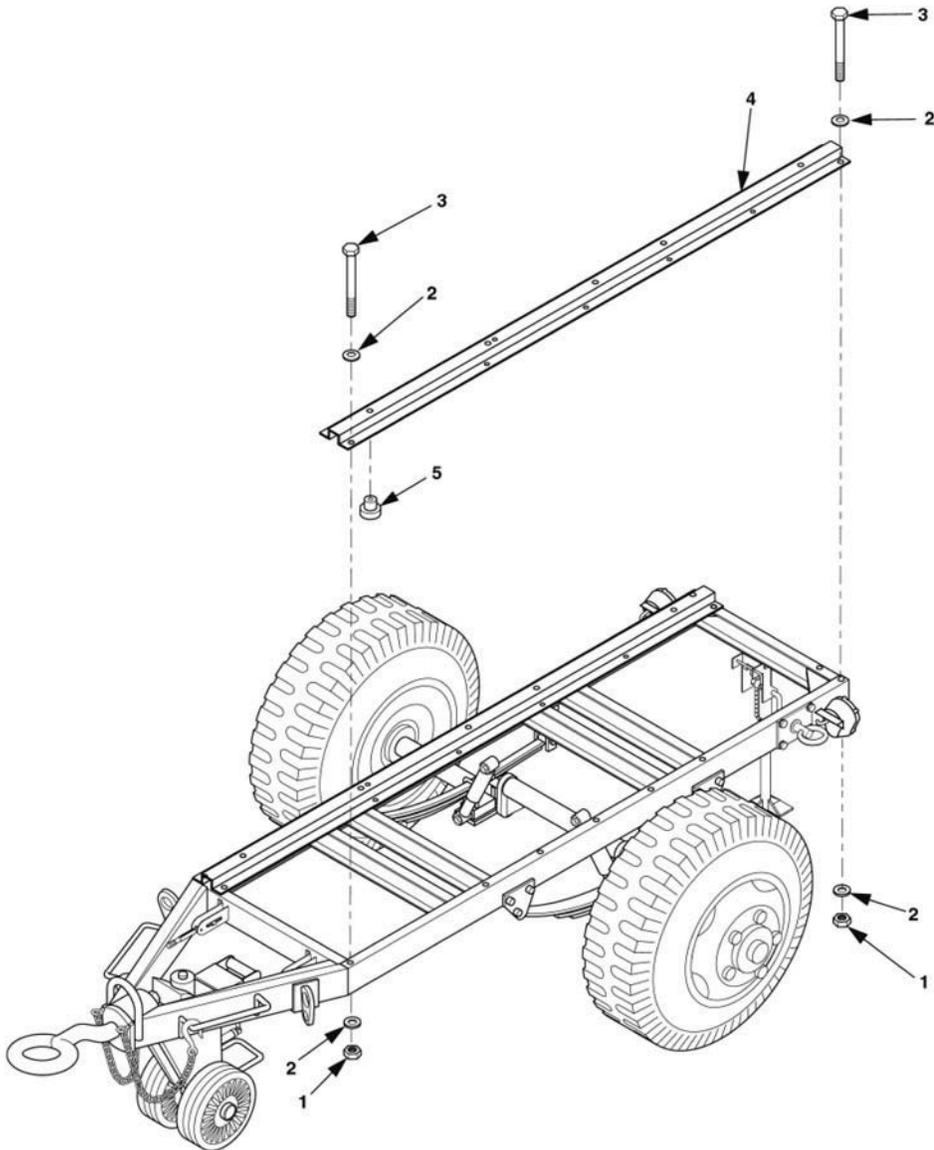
Replace AN/MJQ-37 and AN/MJQ-38 Generator Mounting Rails (M103A3 1½ Ton Trailer).
